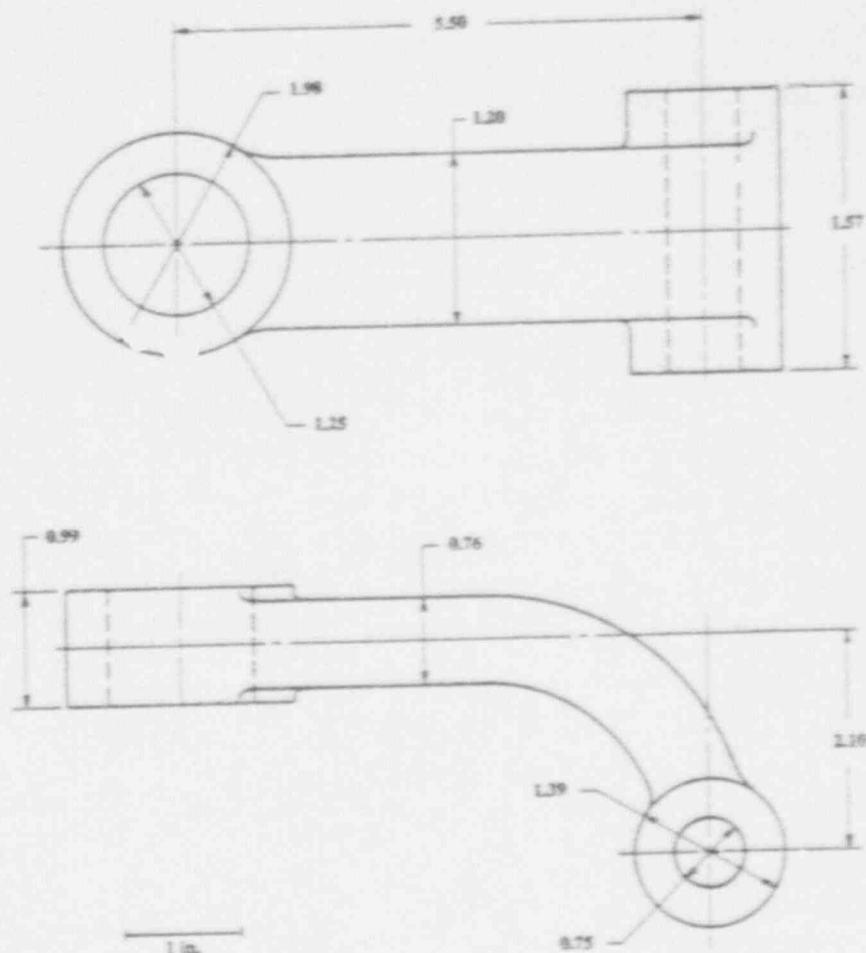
SAMPLE NO. 256, 6-INCH CHECK VALVE. Dimensions in inches. Diagram is schematic.
